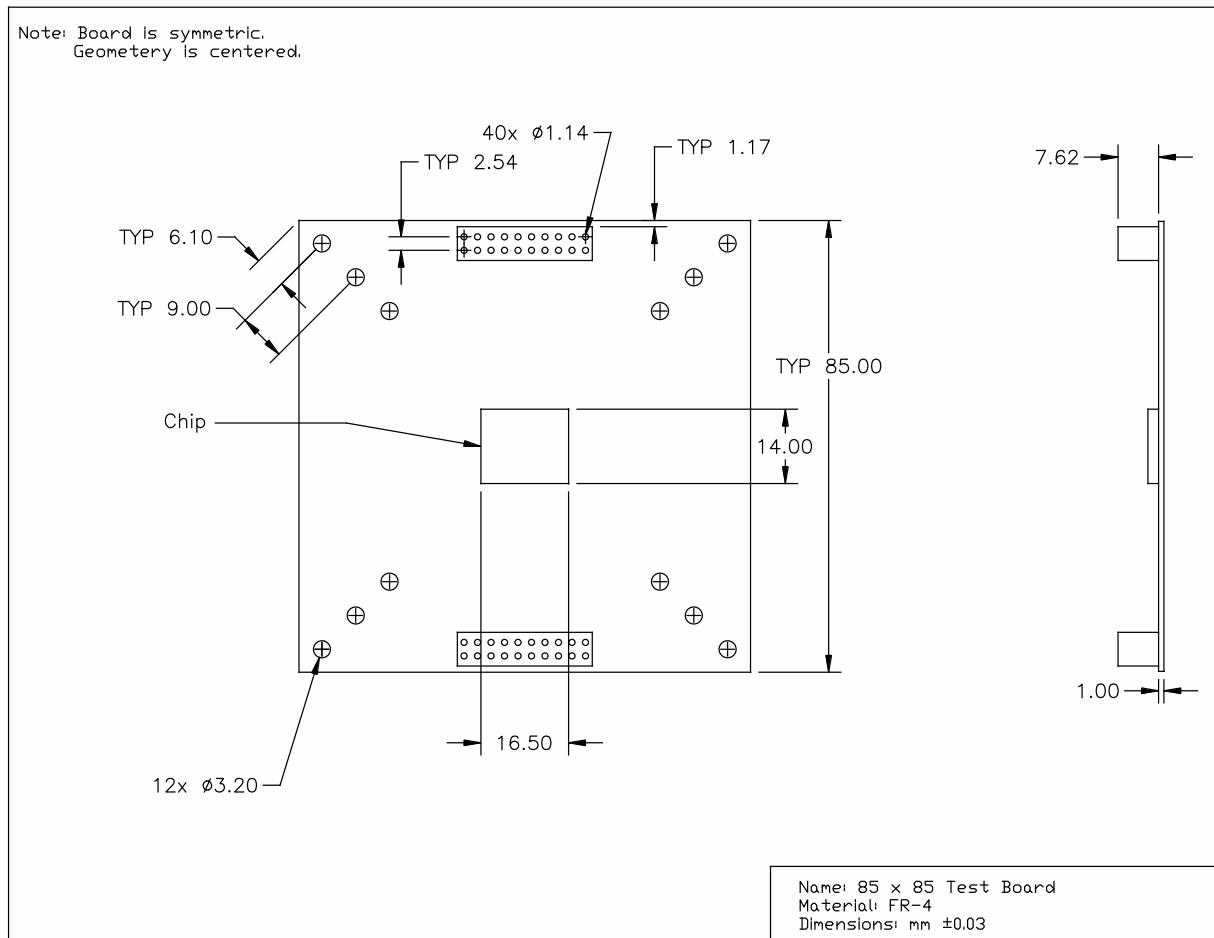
CAD Drawing for Test Board Design for BLRT (for Small IC Packages)
